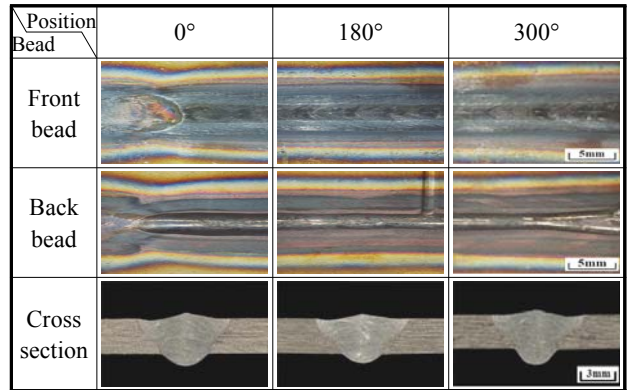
Bead appearance and cross section of optimal condition in pipe welding
